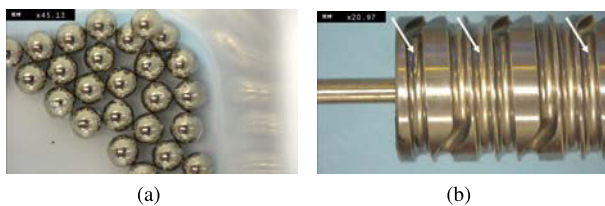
Visual inspection at 13 October 2017. Balls of third circuit (a) and screw shaft (b). The balls show “hammer-blow” signs. The screw threads show signs of wear (white arrows).
